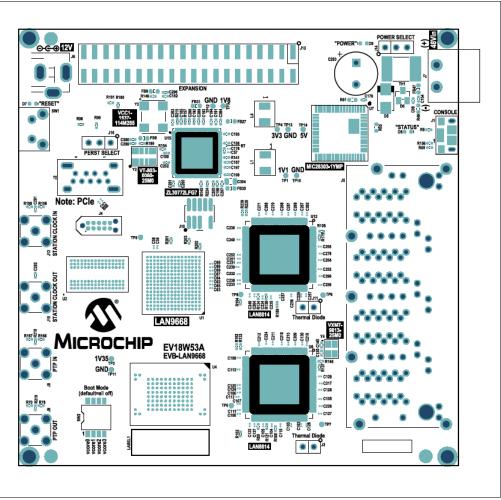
EVB-LAN9668 REFERENCE BOARD OUTLINE
